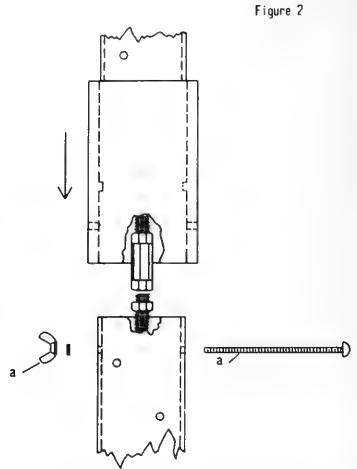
Exploded view of the threaded rod and sleeve component and the male-female fitting of the PVC shaft.
